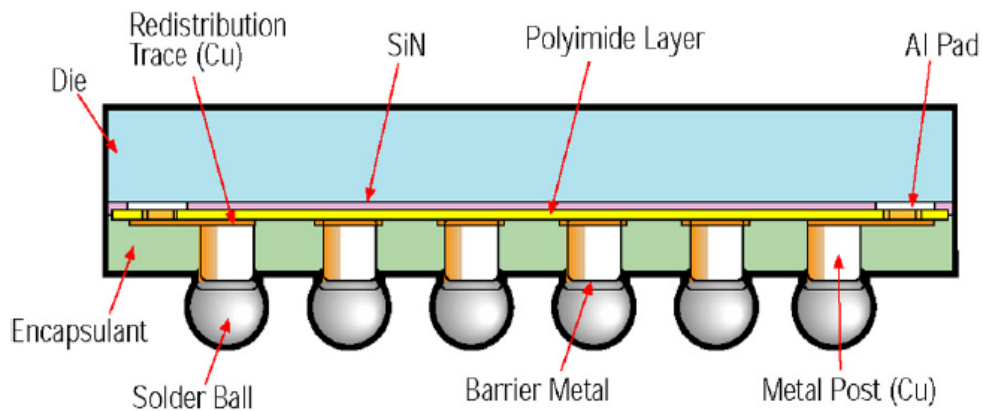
Cross section of package structure of Fujitsu's Super CSP [49]
